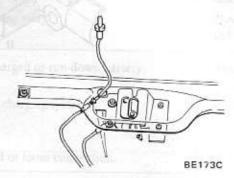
Removing Luggage Room Lamp Switch (Coupe)
